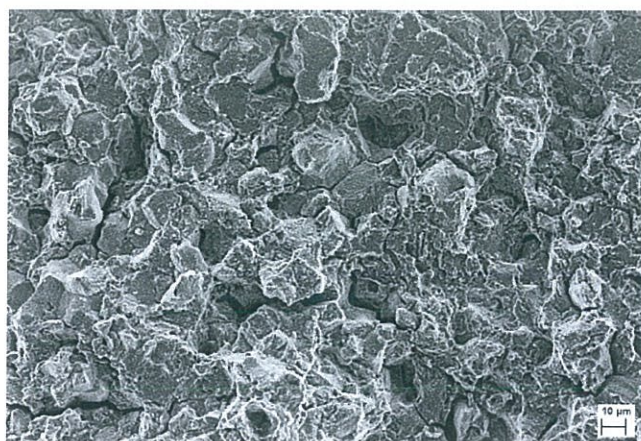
Fracture surface of a screw after failure due to hydrogen embrittlement
